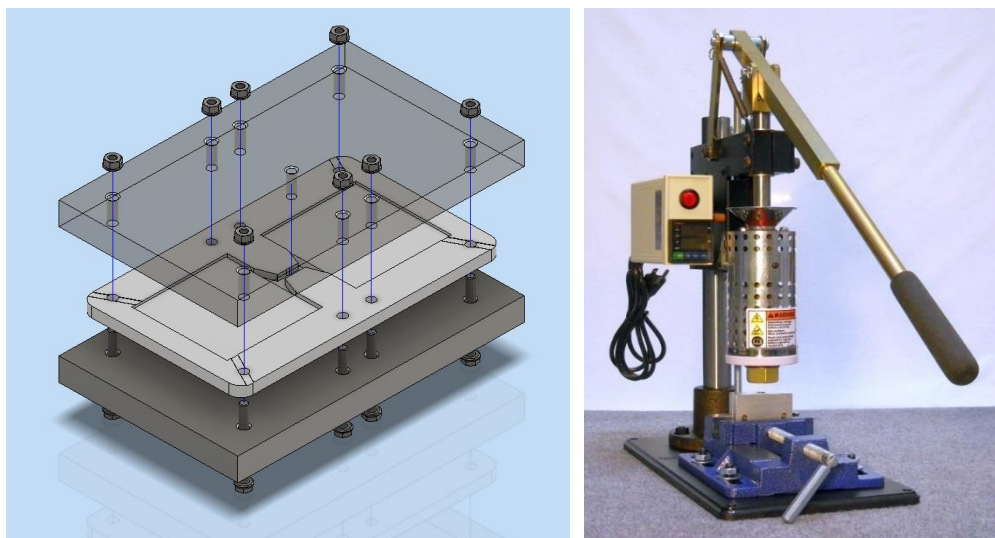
Mould assembly. (Left) LNS injection moulding machine model 150A (Right) (L Technologies, 2019).
